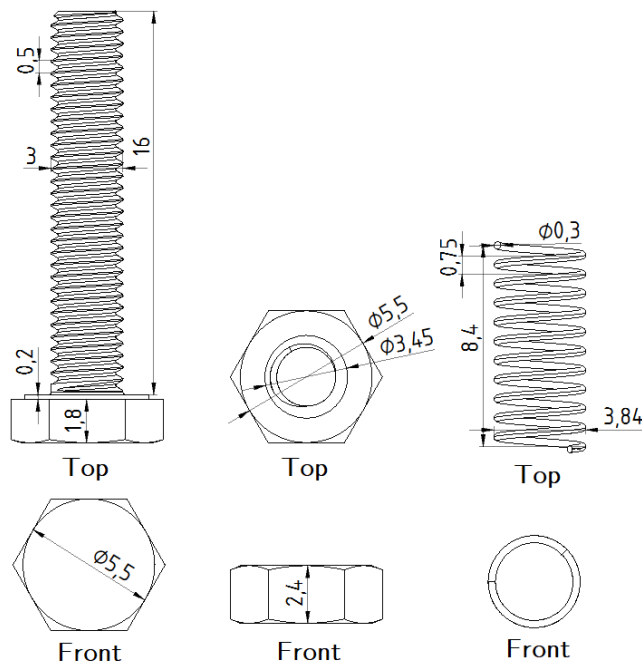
Technical drawing current of bolt, nut, and spring used. Units of length are in millimeters.
